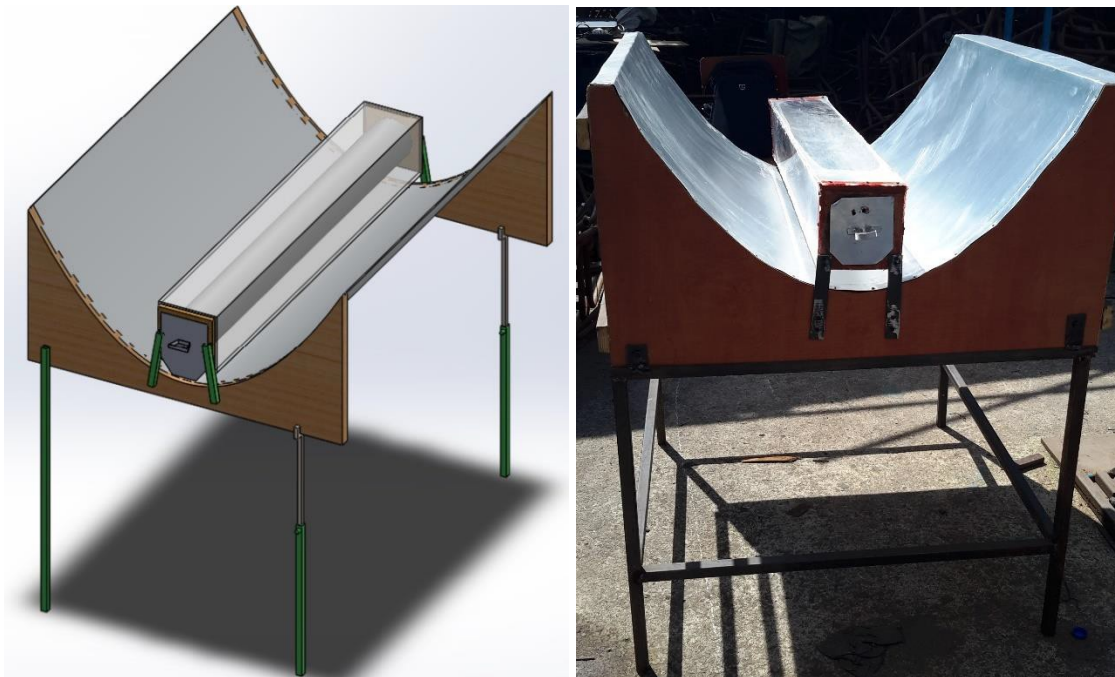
Final assembly in SOLIDWORKS and in practical
